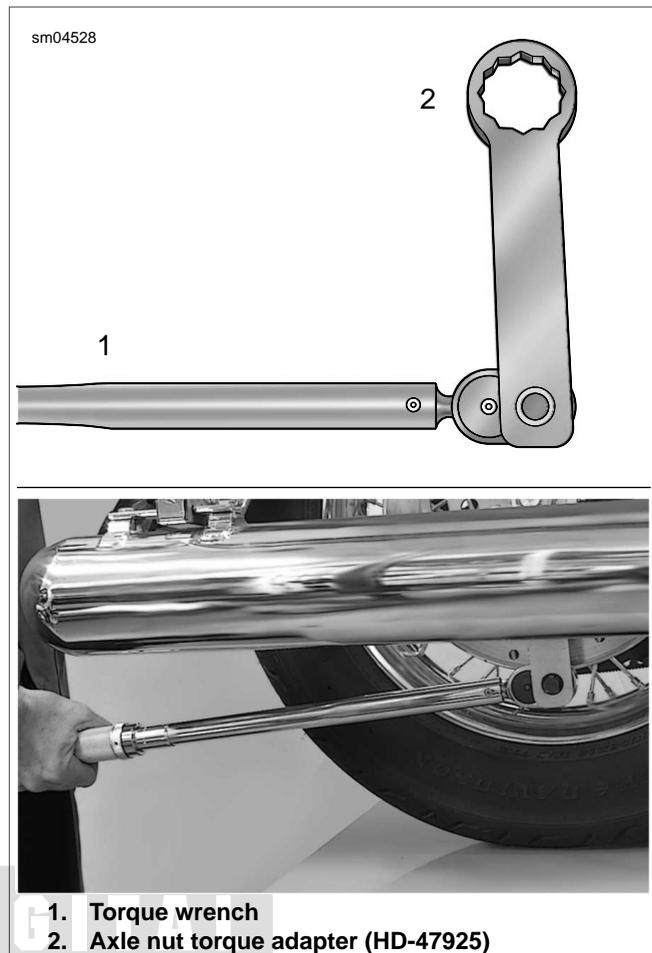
Install Tool Perpendicular to Torque Wrench
